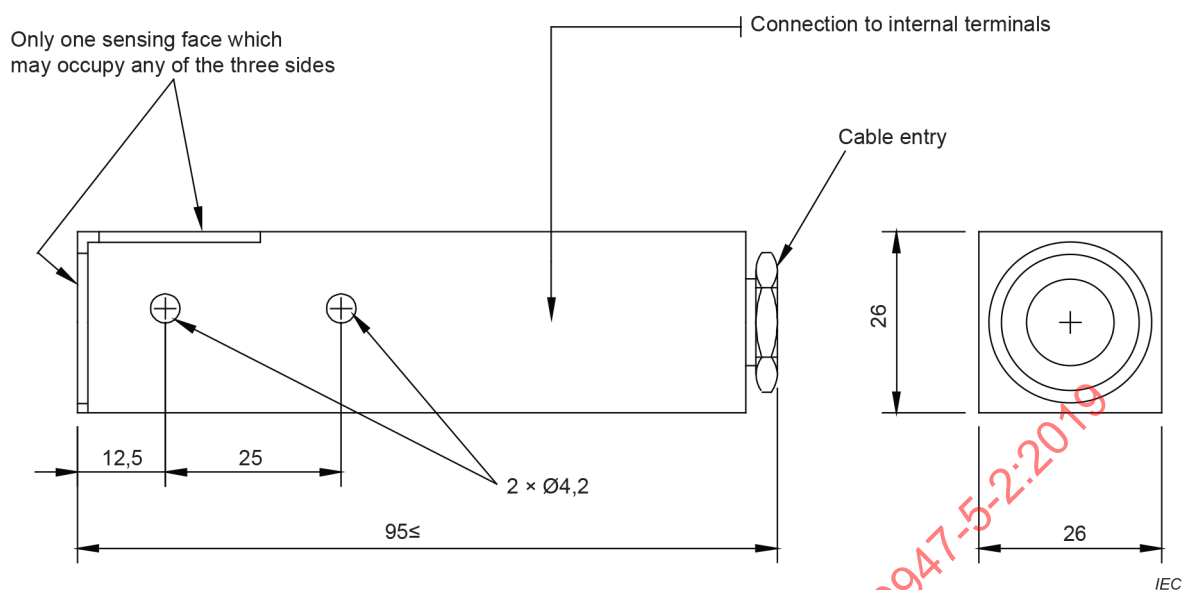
Dimensions of Type I1C26 (in millimetres)
